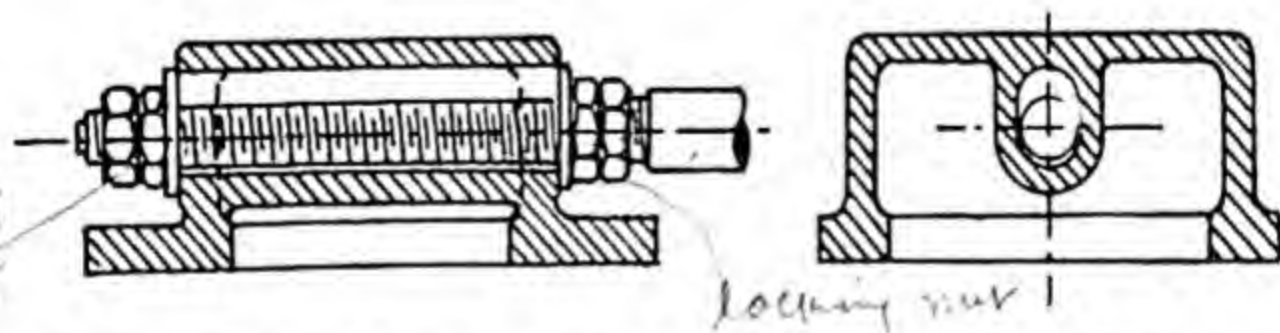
Sections of a slide valve, showing a method of attaching the valve rod.
